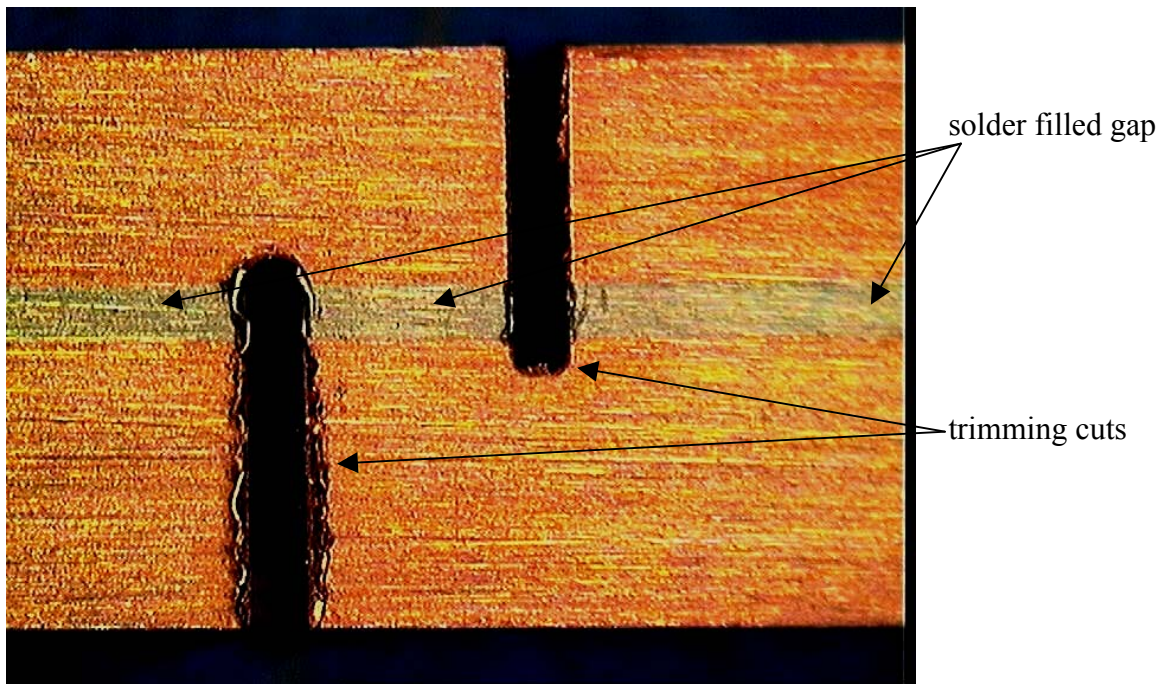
Detailed view of a solder joint for mechanical testing in shear
